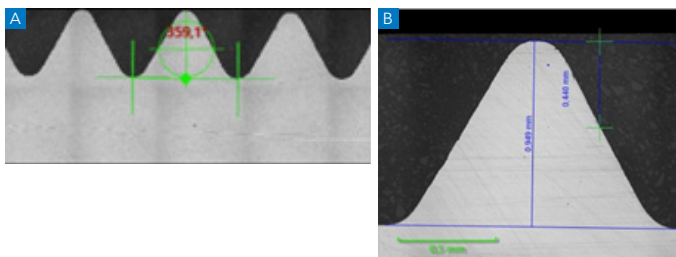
(a) illustrates threaded fastener, (b) illustrating tooth dimension with H of 0.950mm equating to a pitch of at least 1.5mm
